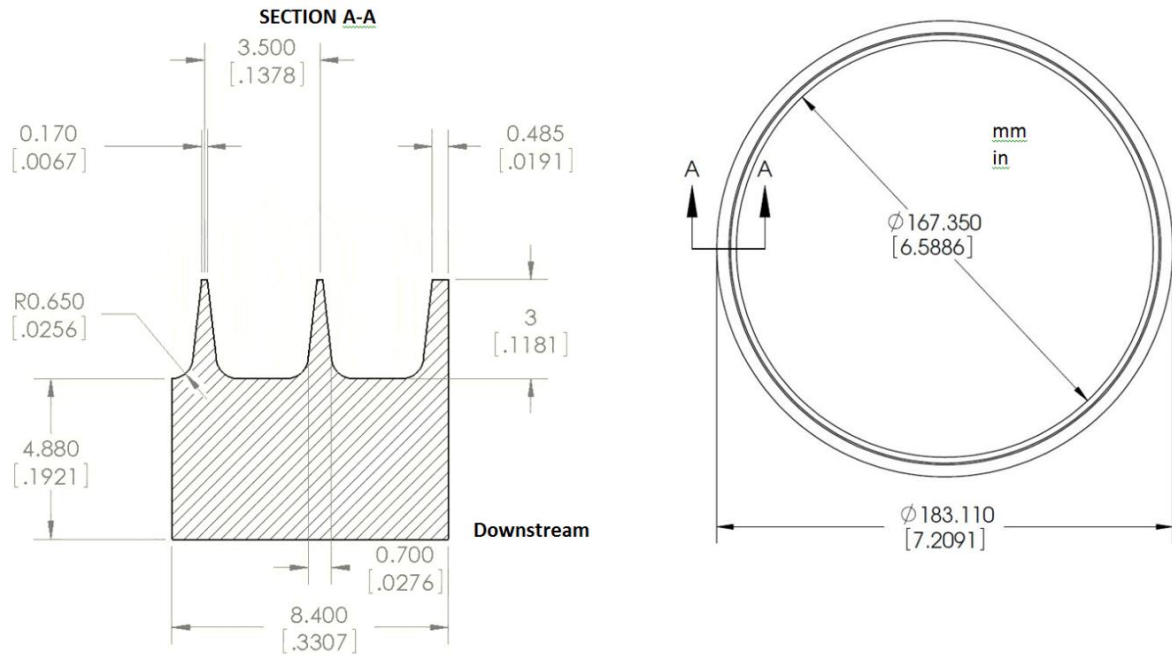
Cross sectional view of steel three teeth labyrinth seal. Dimensions in mm [in].
